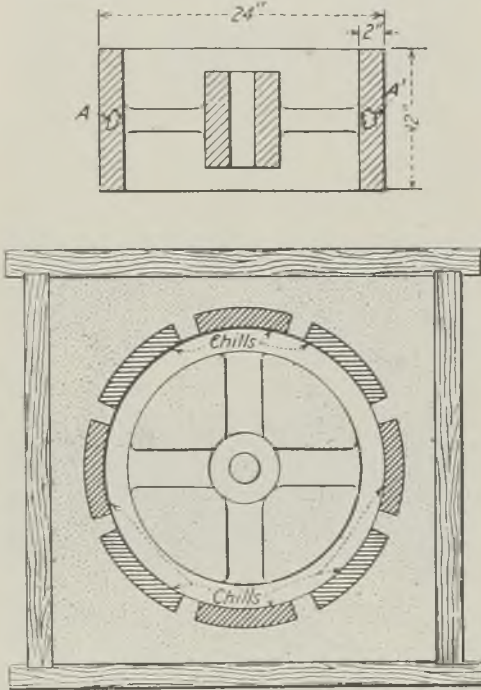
LOSSES FROM SHRINK HOLES IN GEAR CASTINGS CAN BE GREATLY REDUCED BY THE USE OF CHILLS, AS SHOWN IN THE LOWER DRAWING. [FROM "THE FOUNDRY."]
